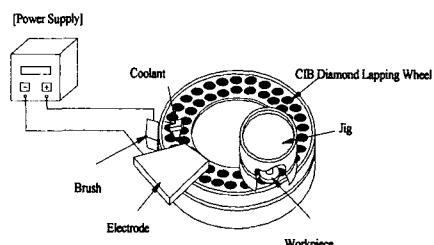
Schematic drawing of In-Process Dressing lapping experimental setup
